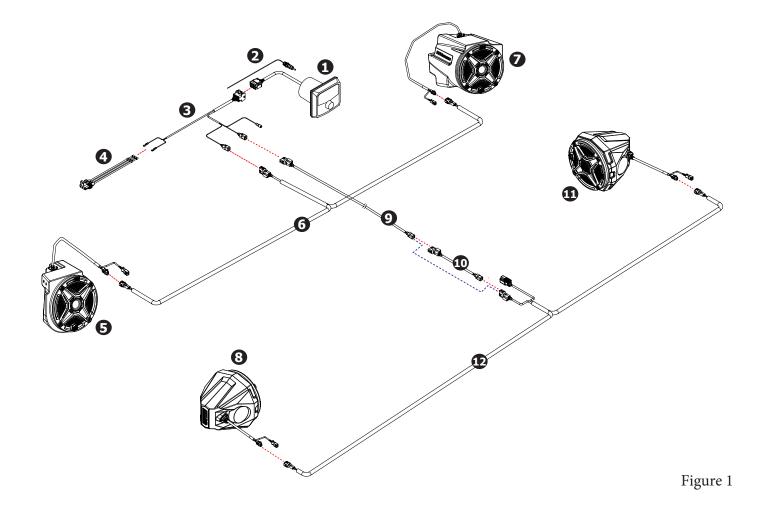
is designed to show the installer a reference overview of the complete 4 speaker wiring diagram. Each installation section will have its own detailed wiring diagram.
